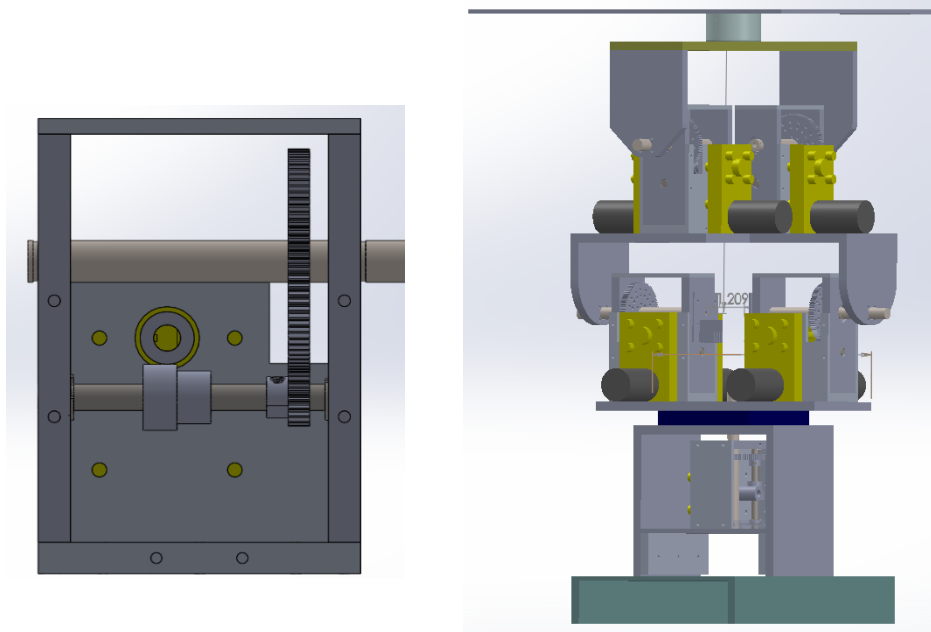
The 3D design device of the gear box including 25:1 worm gear and 1:7 spur gear box (Left) and the 3rd generation ankle positioning device with 5 gear boxes (Right).
